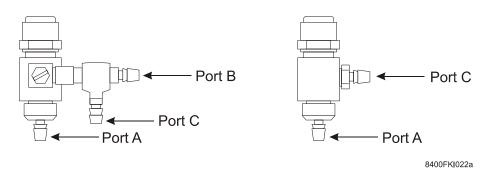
Slug Valve (left) and Singulation Valve (right)
